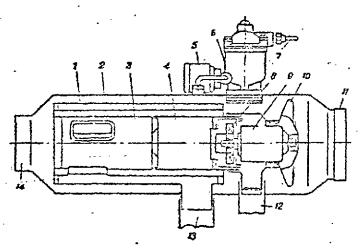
, ELECTRIC MOTOR, FAN AND BLOWER OF HEATER ASSEMBLY
